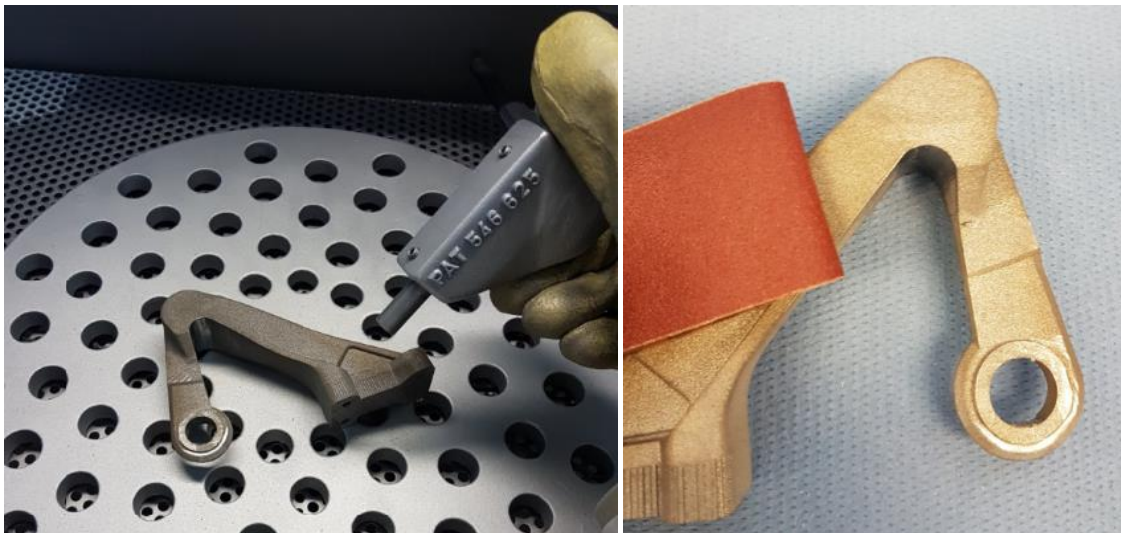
Surface finishing with a blasting chamber (left) or with sandpaper (right) ©FOTEC
